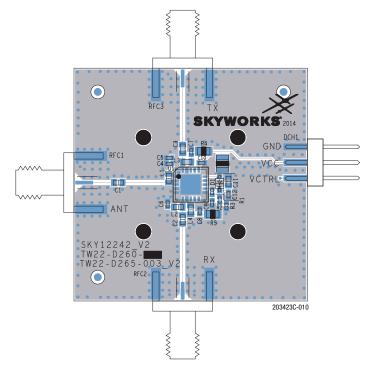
SKY12242-492LF Evaluation Board Assembly Diagram
